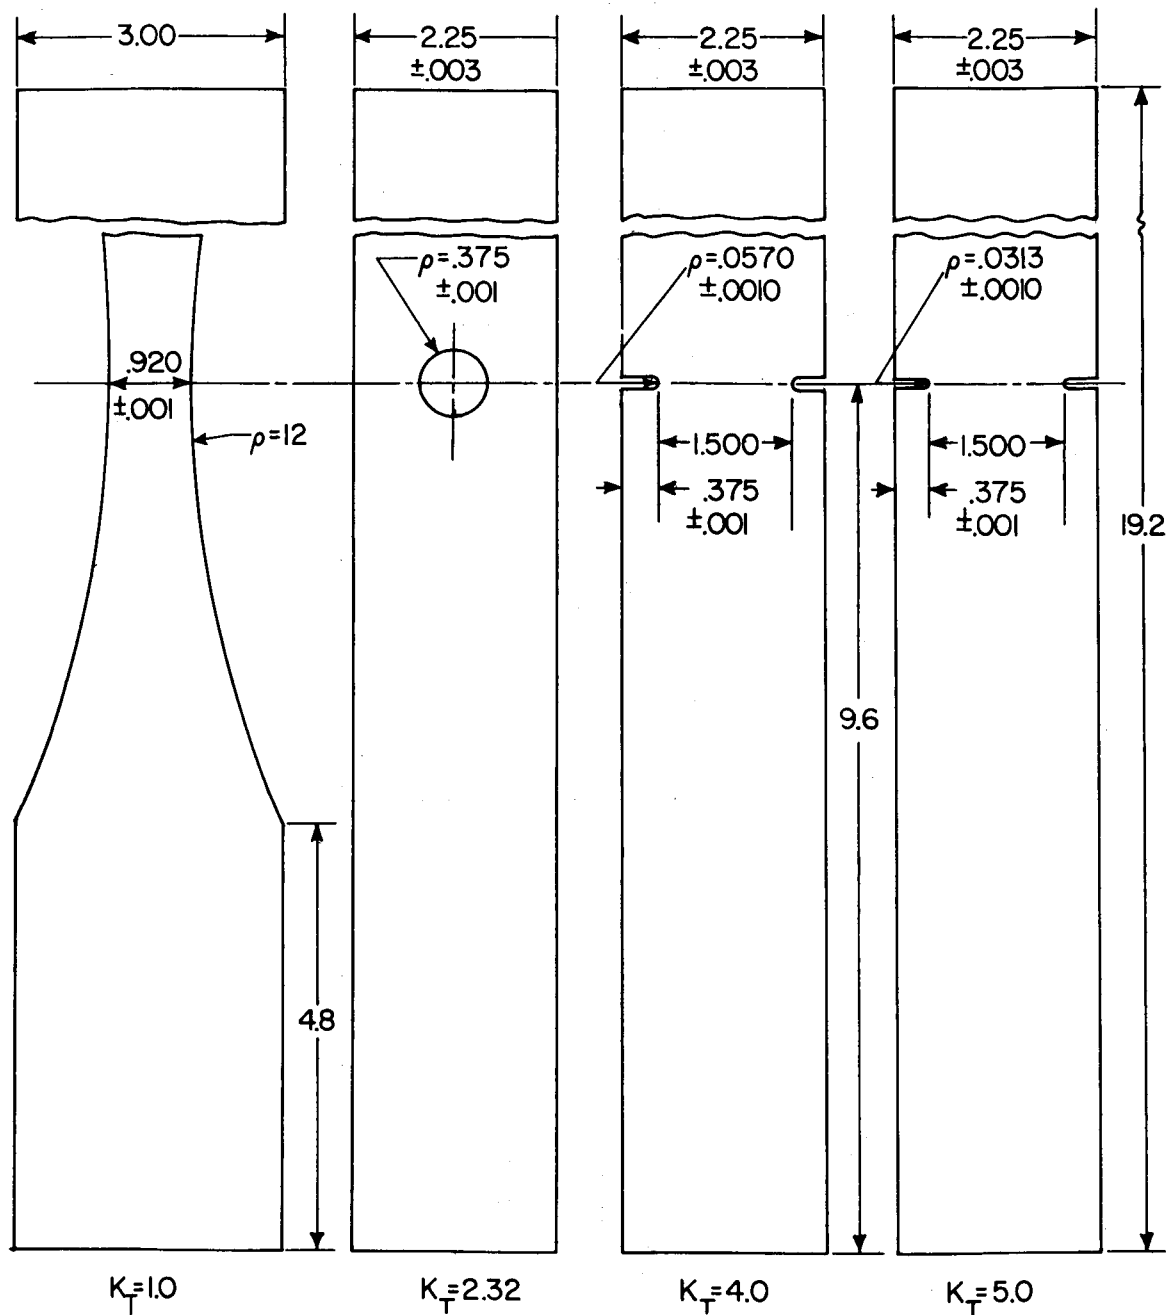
Configurations of sheet specimens. All dimensions are in inches.
